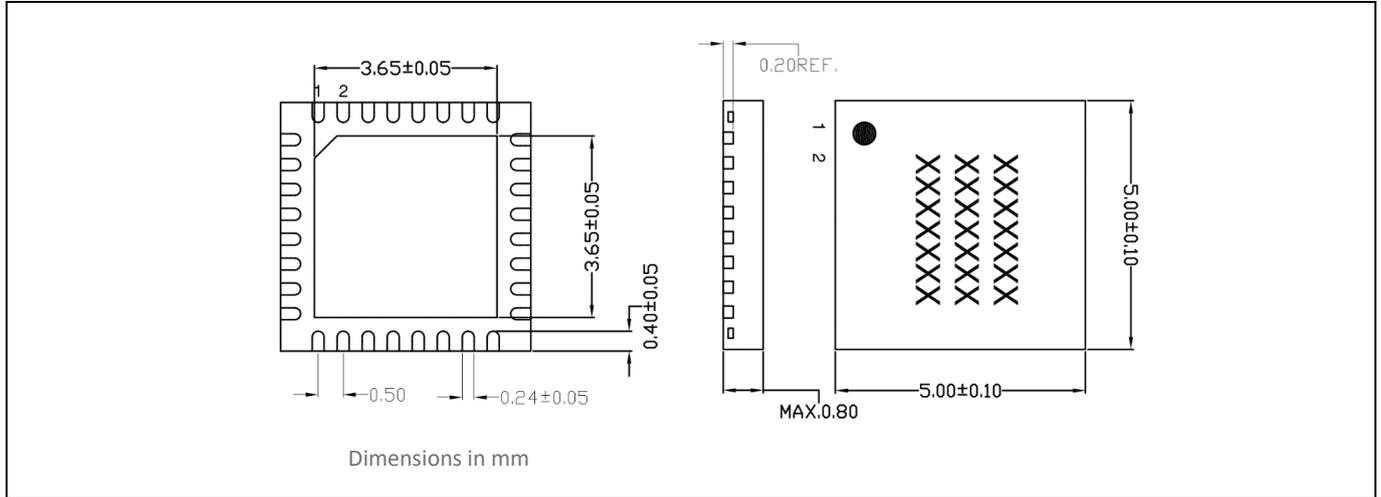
Outline Dimensions of QFN32 Package with Exposed Pad
